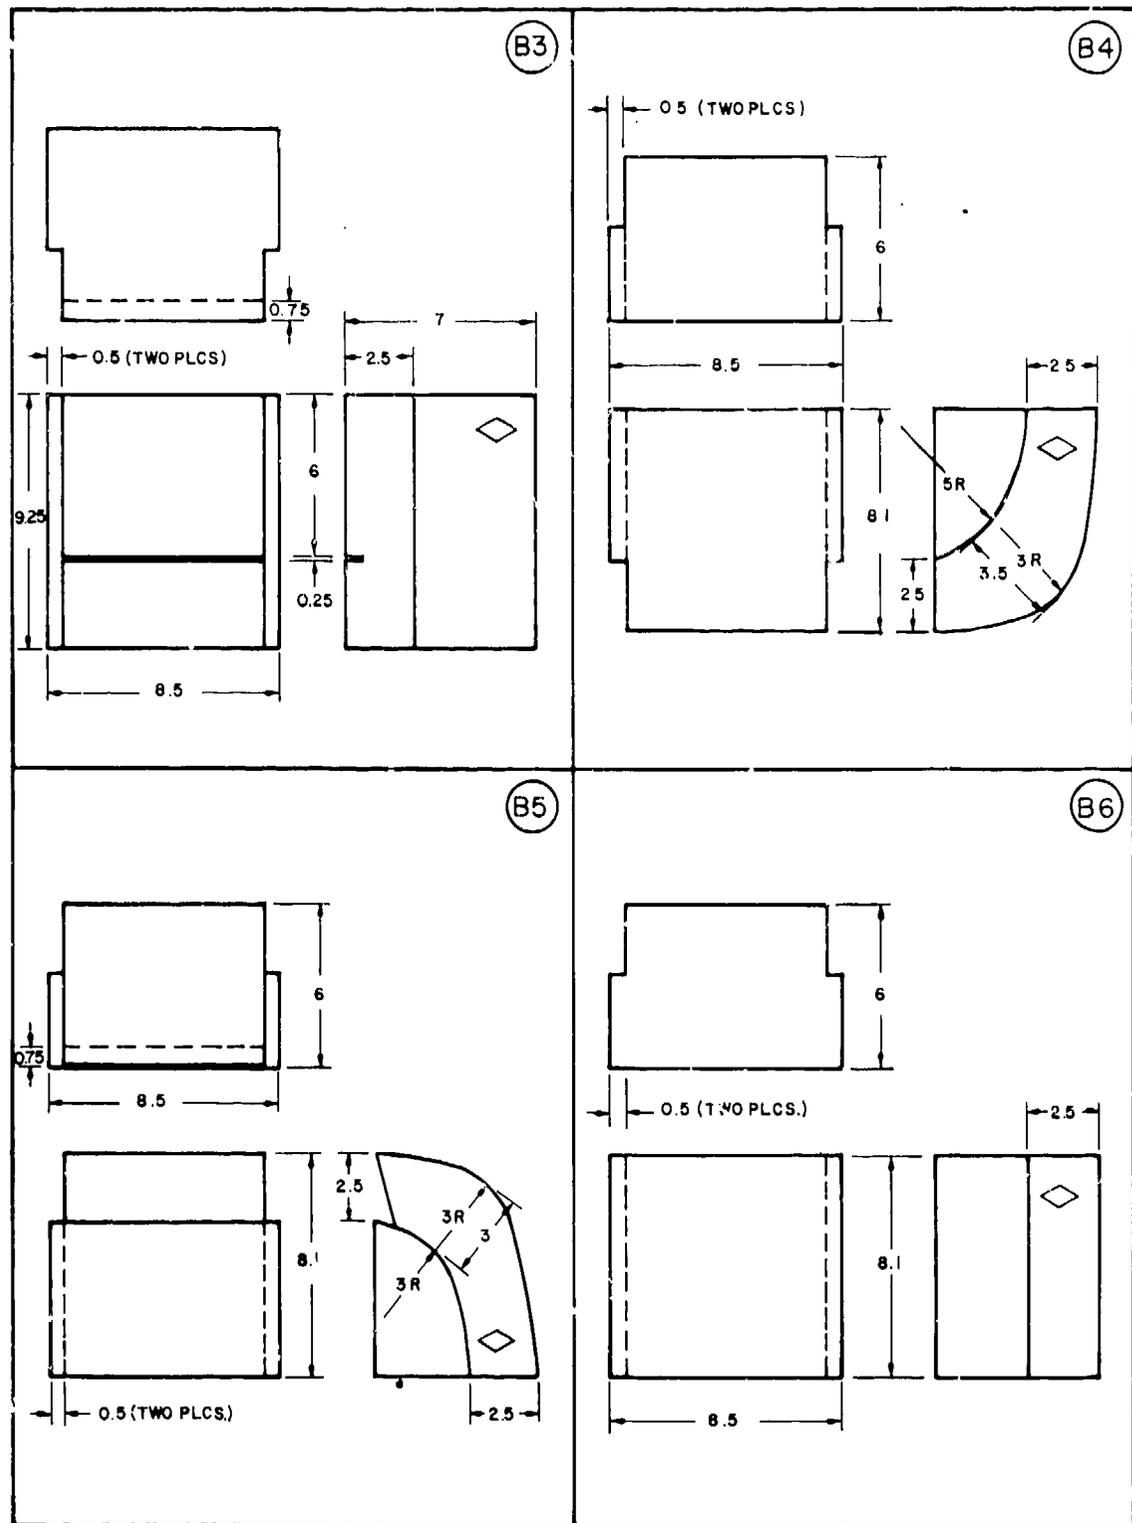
Batt Details, CF-104 Ammunition Compartment Tank
